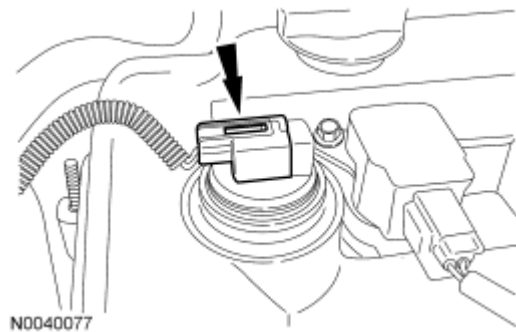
Locating Variable Camshaft Timing (VCT) Solenoid Electrical Connector
